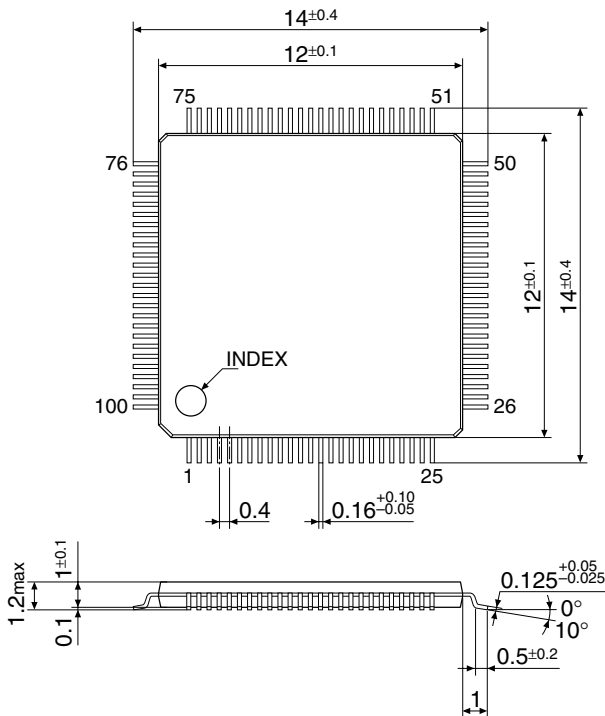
TQFP14-100pin Package Dimensions
